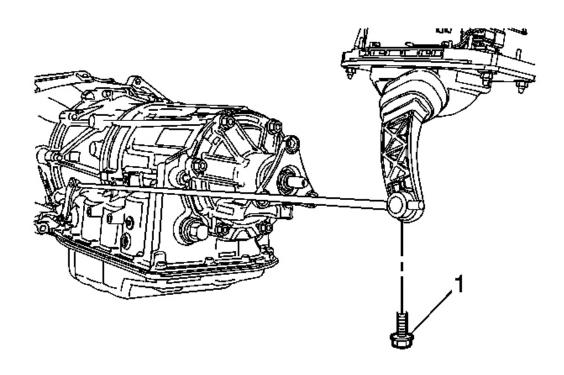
Shift Control Linkage Rod Bolt Courtesy of GENERAL MOTORS CORP.
